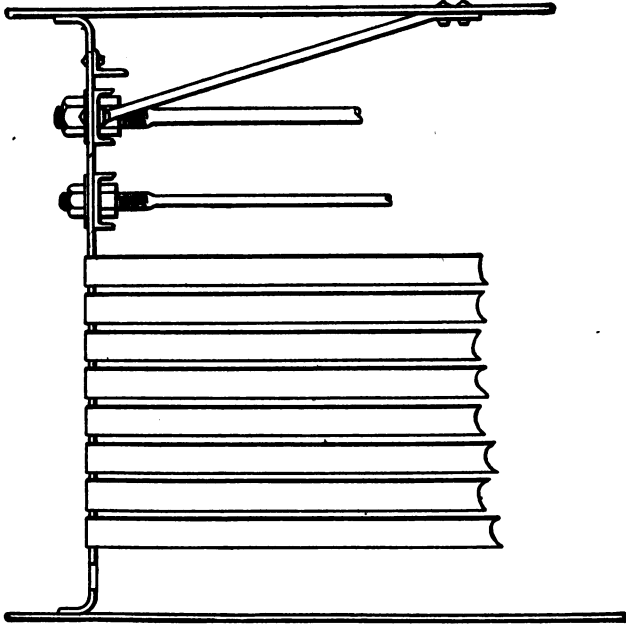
SIDE VIEW OF A BOILER HEAD WITH THROUGH BRACES.
